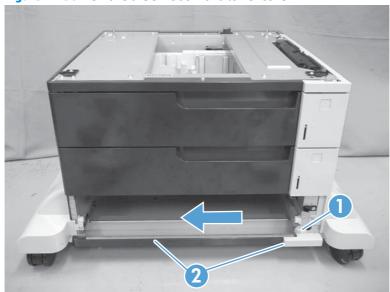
Remove the 3 x 500 paper deck pickup motor
